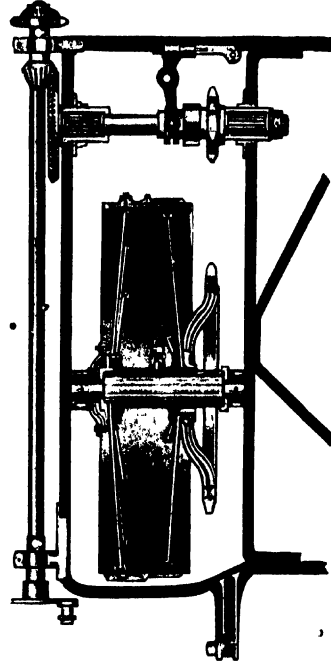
MAIN FRAME AND BEARINGS OF LEFT-HAND CUT BINDER; SHOWING FORWARD POSITION OF DRIVE WHEEL, ROLLER BEARINGS IN CROSS SHAFT, AND ALIGNMENT OF MAIN CHAIN SPROCKETS. [Harrison, McGregor.]
